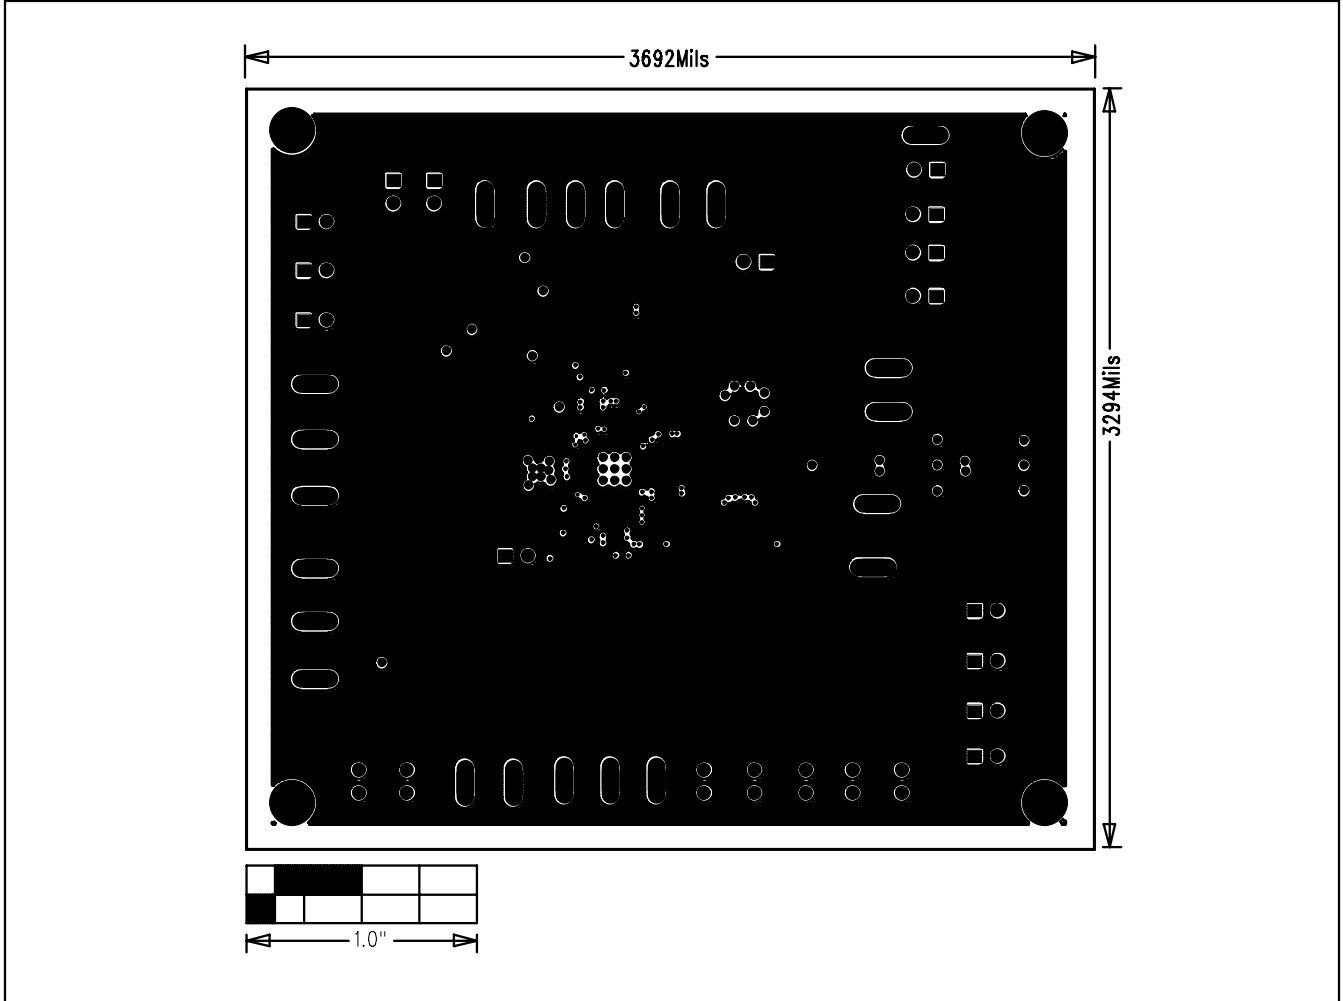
MAX8662 EV Kit PCB Layout—AGND Layer 4
